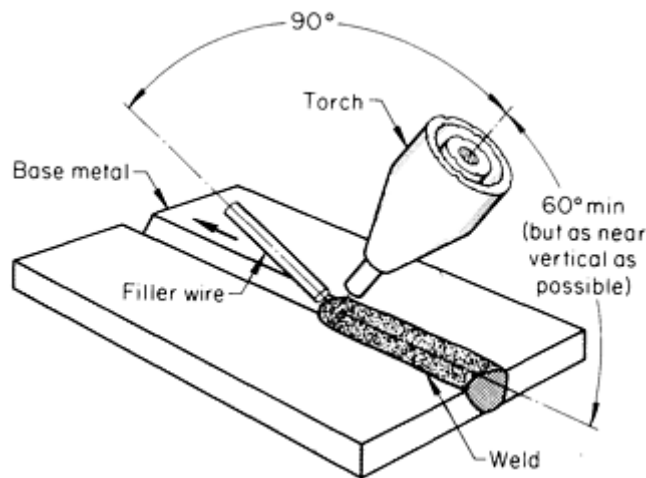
RECOMMENDED GTAW SETUP FOR JOINING TWO MAGNESIUM ALLOY PLATES
